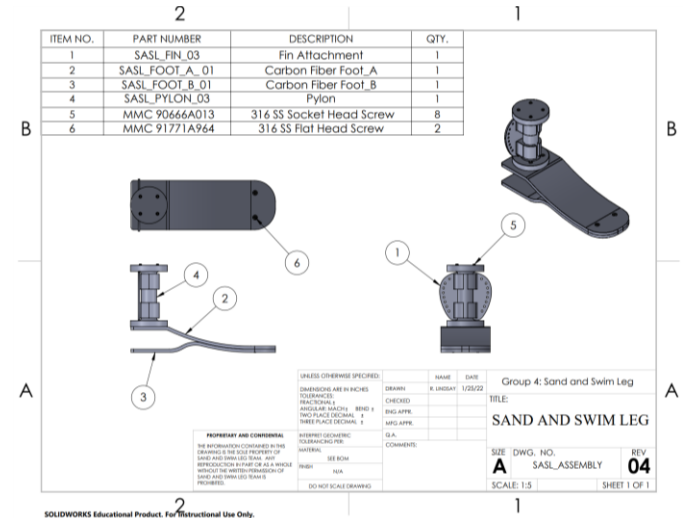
SolidWorks Assembly of Sand and Swim Leg
